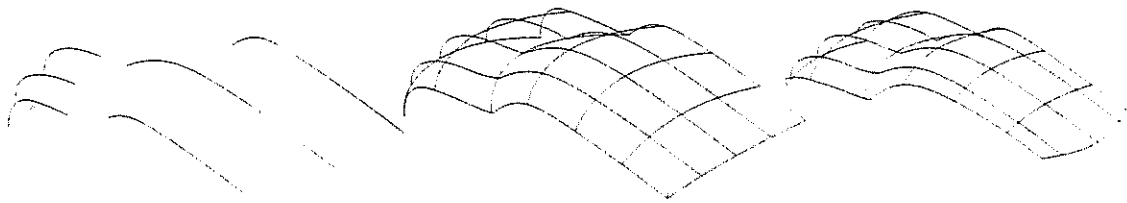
Wires, base surface, and trimmed surface of the top of the car
